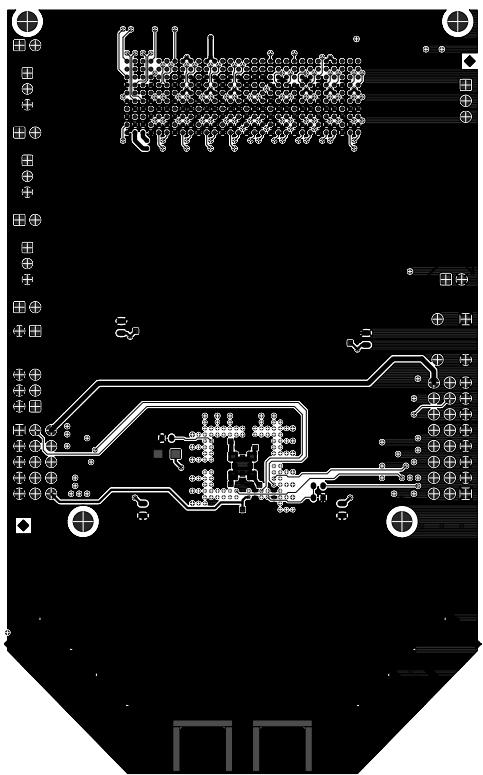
Si5100-EVB Layer 8—Solder Side (Daughter Card)
